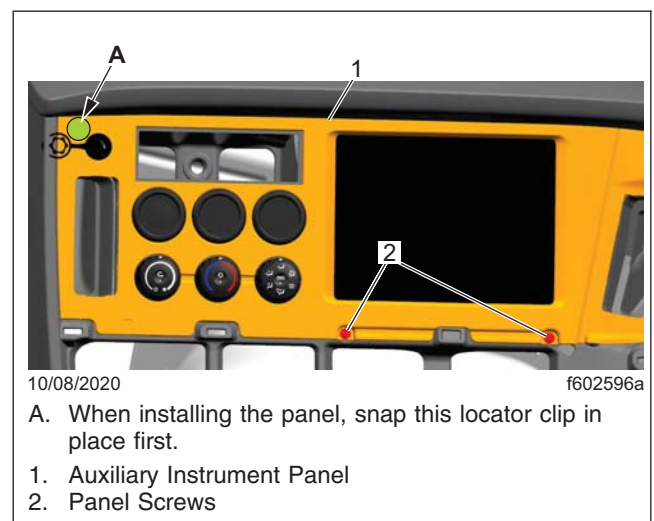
, Right-Hand Drive Auxiliary Instrument Panel Removal and Installation
